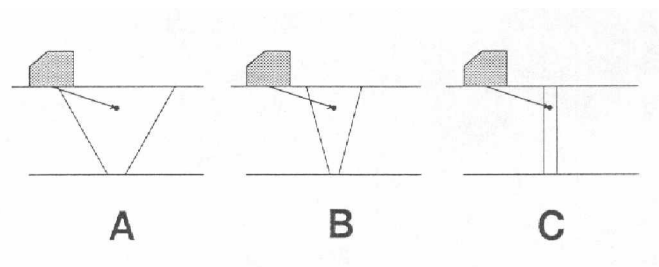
A complete volumetric inspection of a wide weld should be more difficult than for a narrow weld, if other parameters are equal.
